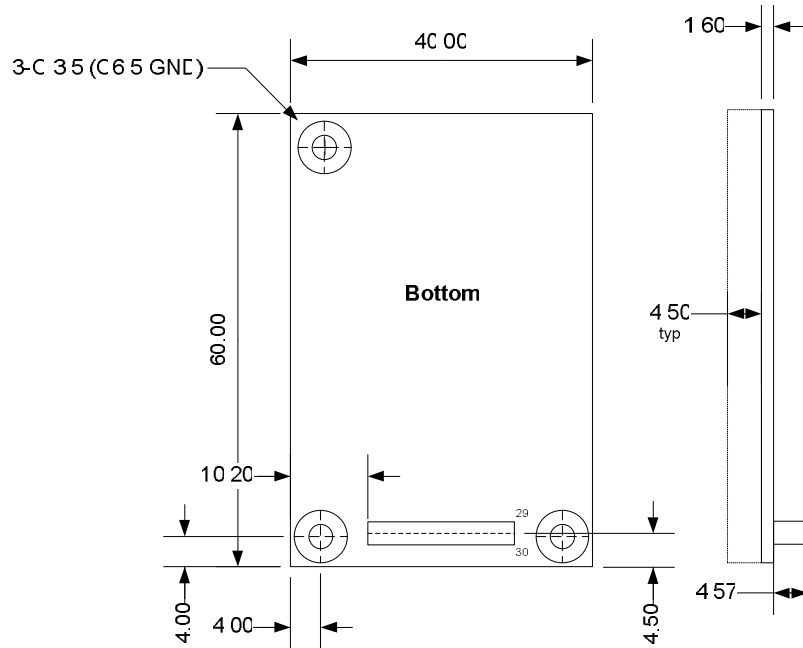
Mechanical drawing of the miniature GPTiMe SMT module
